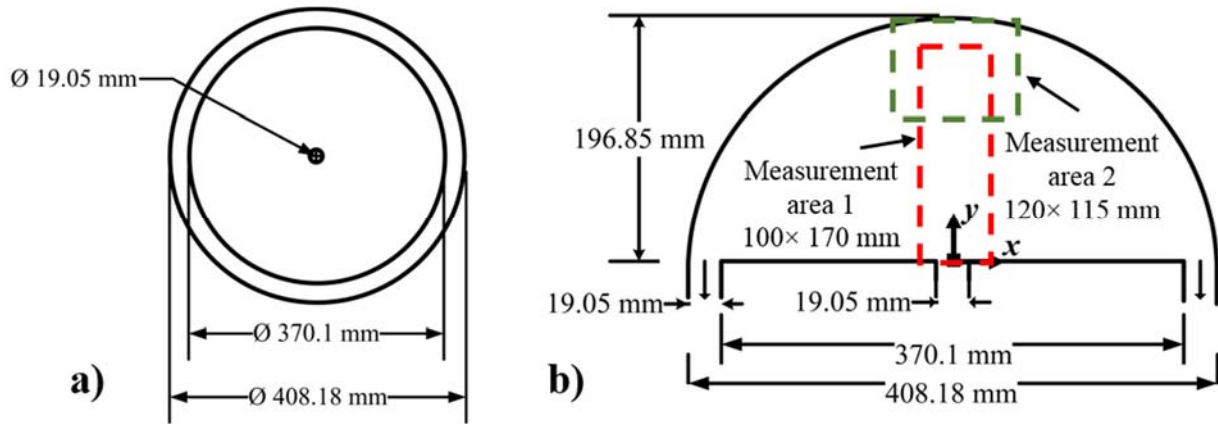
The dimensions of the upper plenum, a) top view and b) cross-section view.
